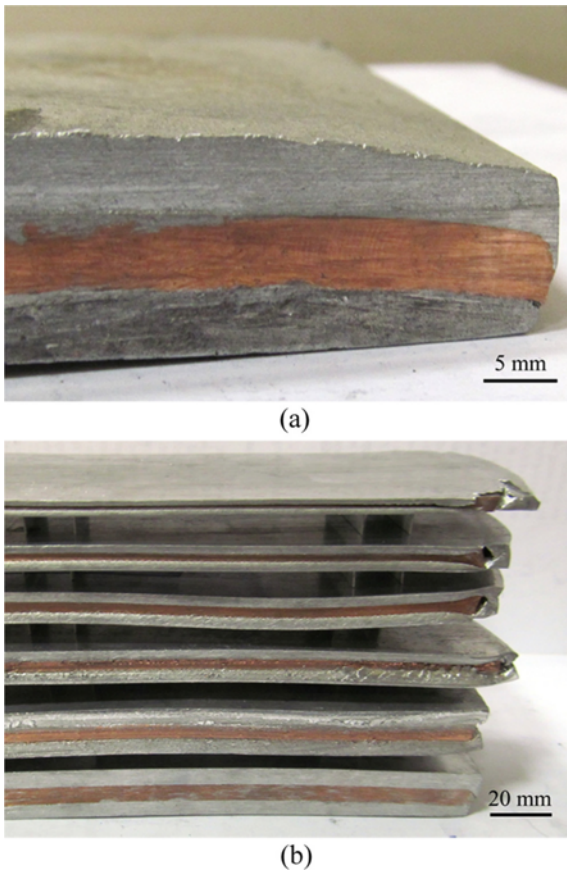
Laminated composites fabricated by explosive welding (a) before and (b) after cold rolling under different thickness reductions.
